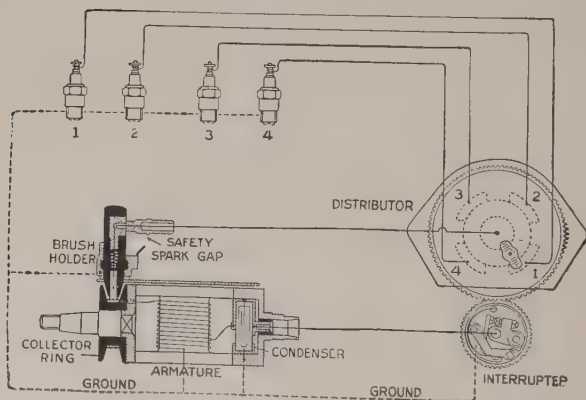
Circuit diagram for the magneto on a four-cylinder engine.
